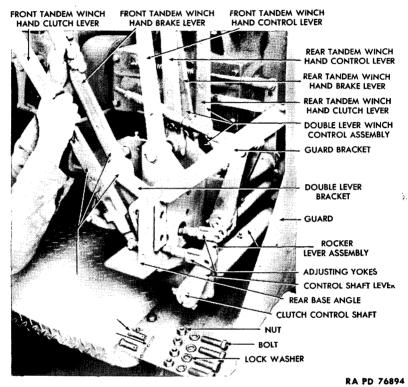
Removal of Front Tandem Winch Hand Clutch and Brake Levers
